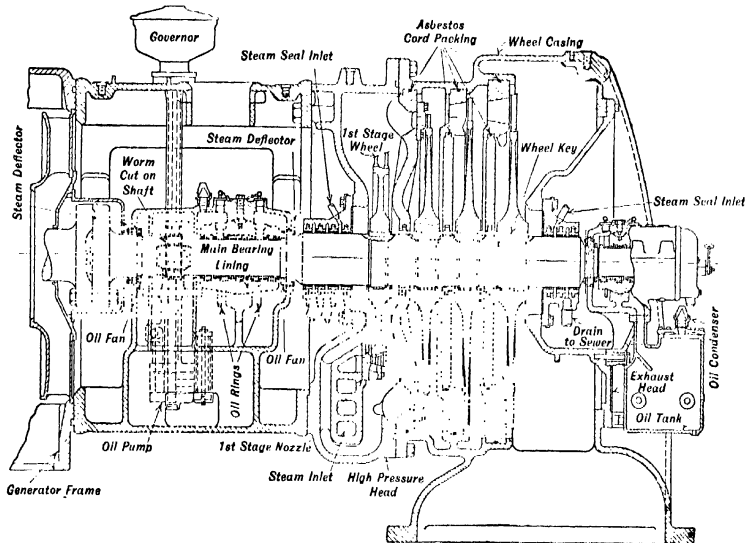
4-Stage Condensing Curtis Steam Turbine — Sectional View.
